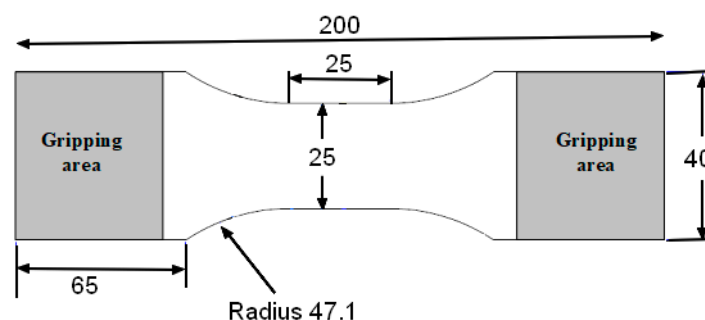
Geometry of the 8.4 mm thick test specimen. (units are in mm).
